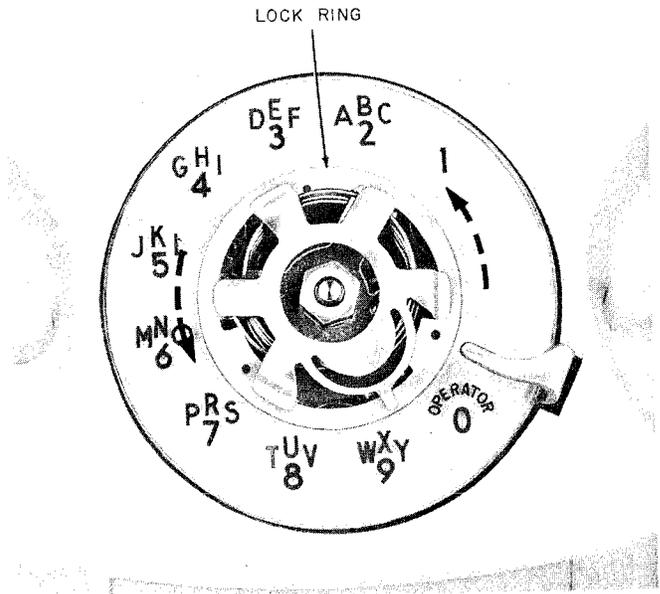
8-Type Dial, Fingerwheel Removed to Show Lock Ring
